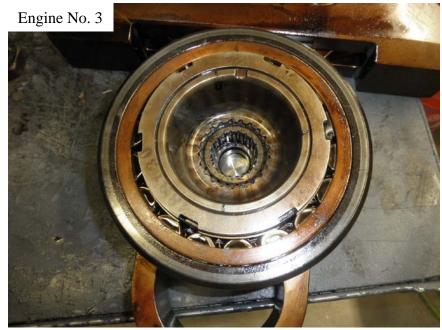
View of rear crank shaft bearing showing that it was intact and the rollers were in place.
